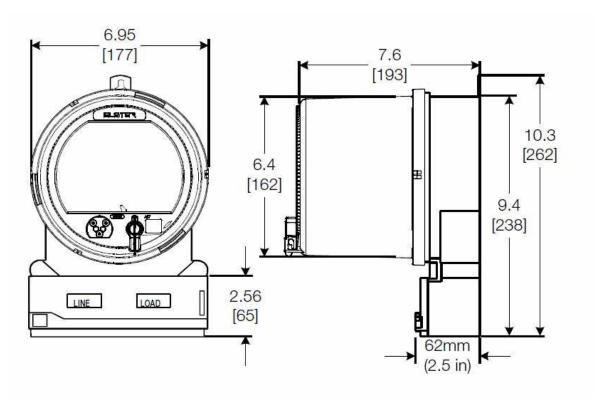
2. A-base Meter Type and Dimensions in Inches (millimeters) - Front and Side View
